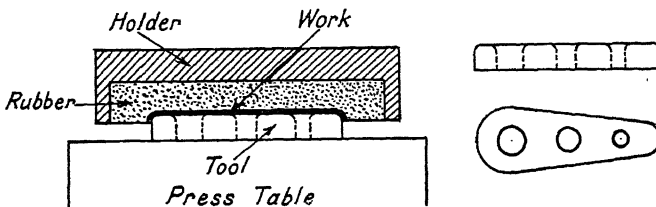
FORMING FLANGES ON THE COMPONENT SHOWN IN FIG. 11, FOR WHICH OPERATION A RUBBER PRESS IS USED. ON THE RIGHT IS A PLAN AND ELEVATION OF THE TOOL
